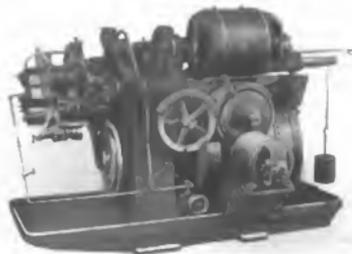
Gridley Lathe. Front View showing Feed Motor
